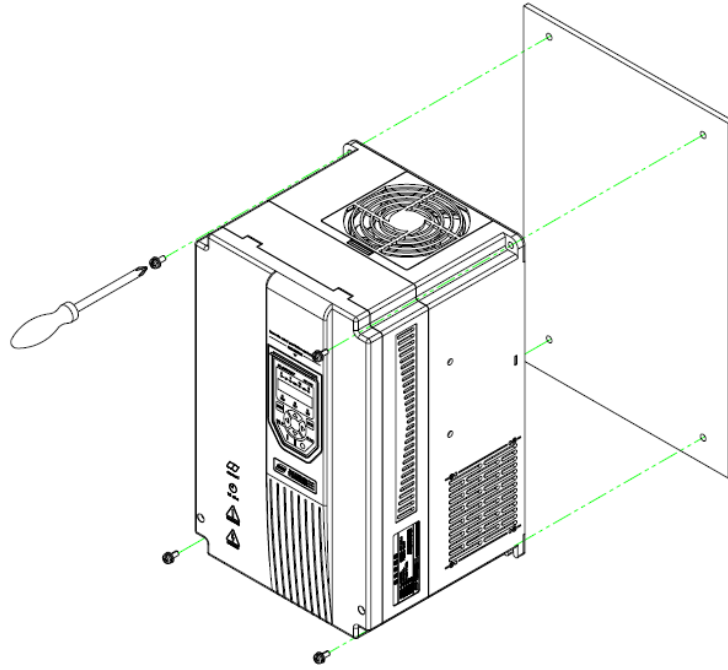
Wall-mounted Installation for Hope530G0.75T4-H~Hope530G37T4-H Models
